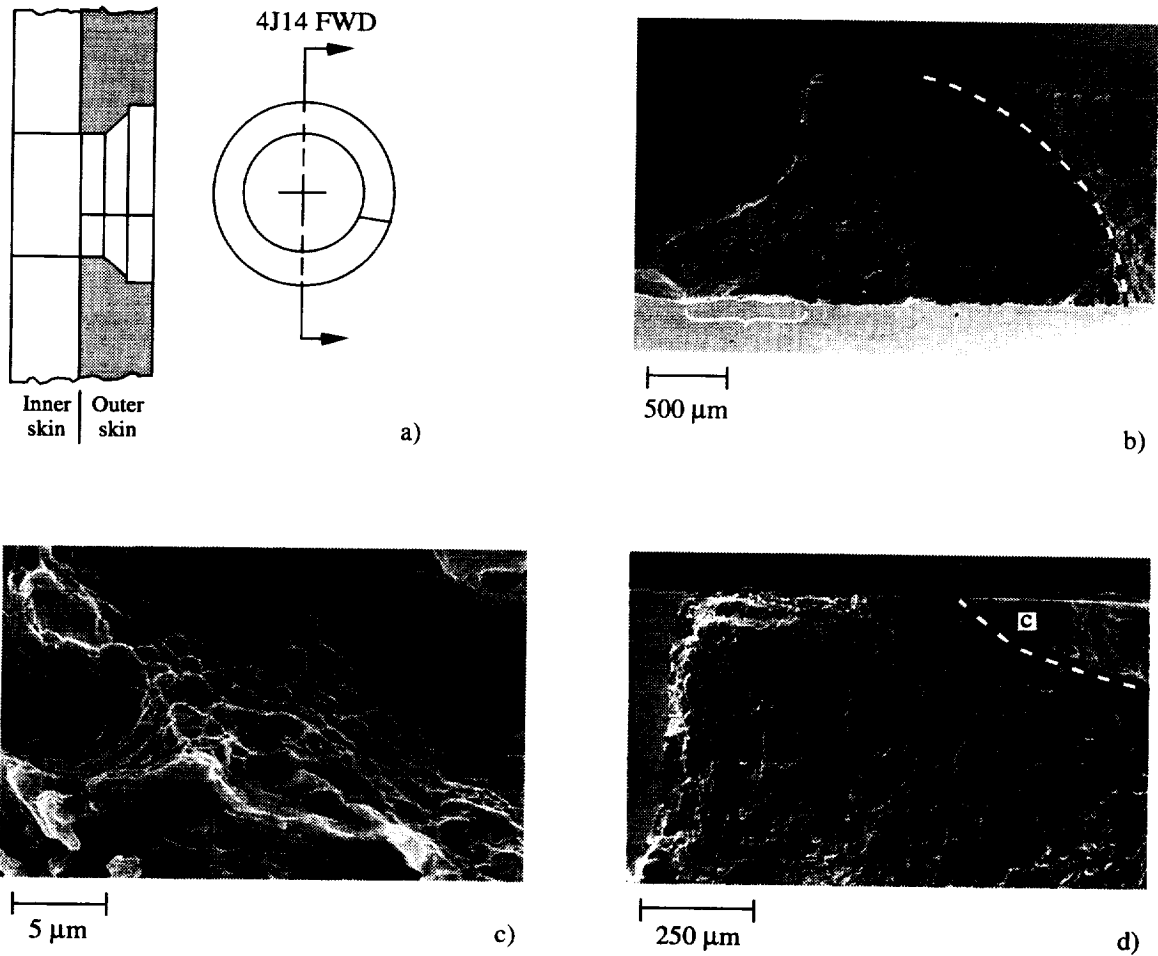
a) The schematic shows the rivet hole 4J14 configuration and the location of the outer skin fatigue crack oriented in the forward direction and about the 4 o'clock position. b) The SEM micrograph shows the fatigue crack fracture surface located at the outer skin rivet hole (left). The bracket marks the likely crack initiation site and the dashed line marks the fatigue crack front. c) The SEM micrograph shows the ductile tearing morphology of the overload fracture surface at region "c" in Figure 11.11.d at high magnification. d) The SEM micrograph shows the fatigue crack front region (dashed line) as it intersects the outboard surface of the outer skin. The rivet hole is located to the left.
